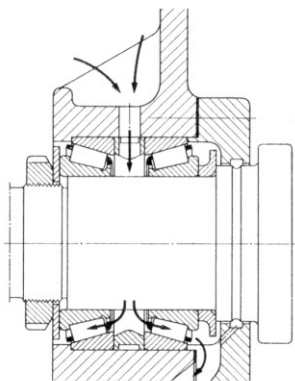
Circulating oil system for a spindle bearing arrangement incorporating two taper roller bearings
